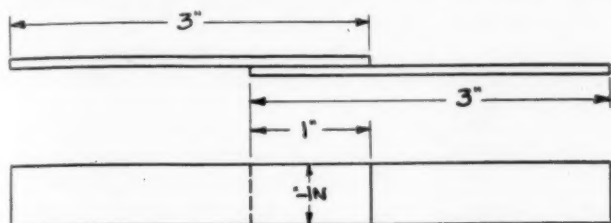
TEST SPECIMEN FOR SOLDERED JOINTS
